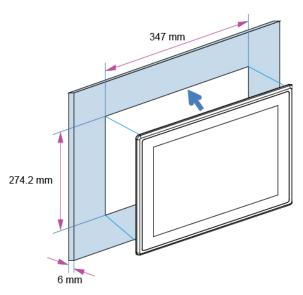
SPC-15xx Panel Mount Cut-out hole and maximum panel thickness
